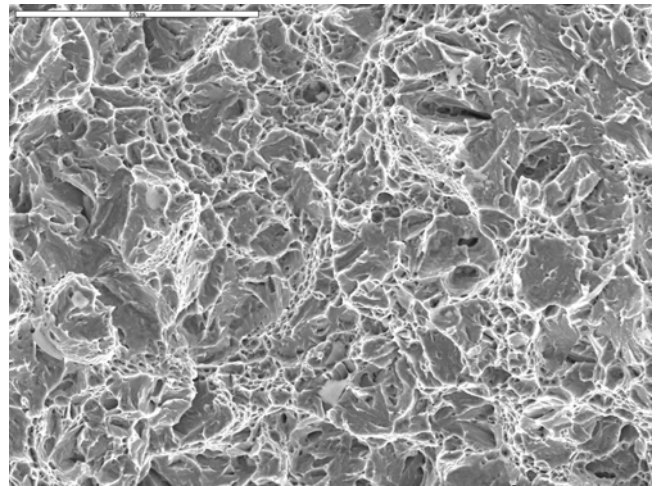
Fractography of Hardox 500 steel tested at -40°C
